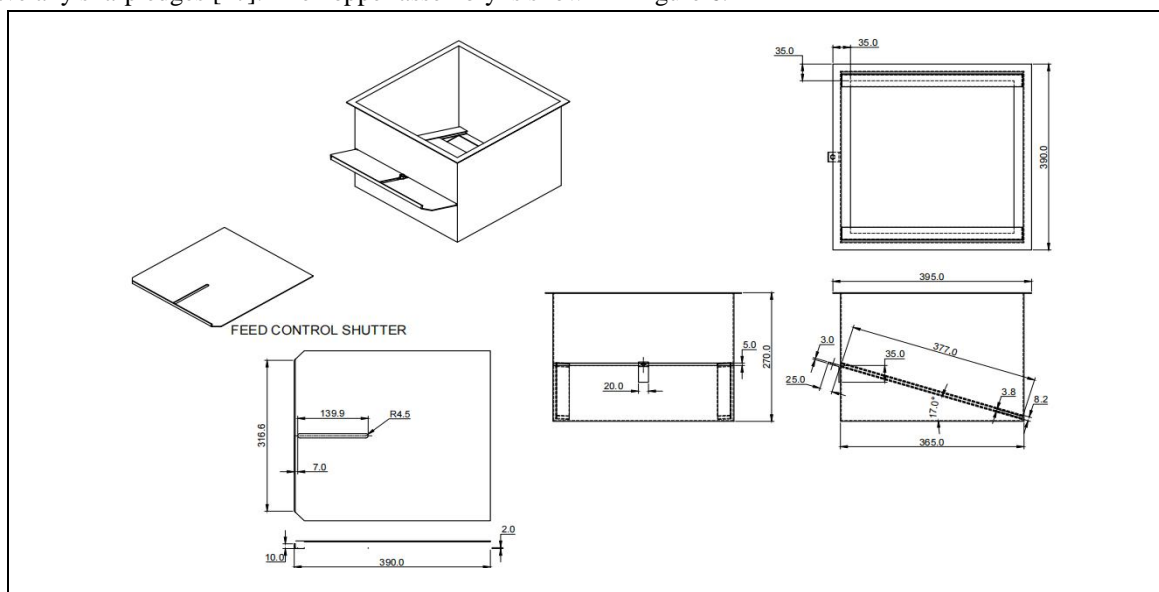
Isometric view, top view, side view of a hopper and feed control shutter
